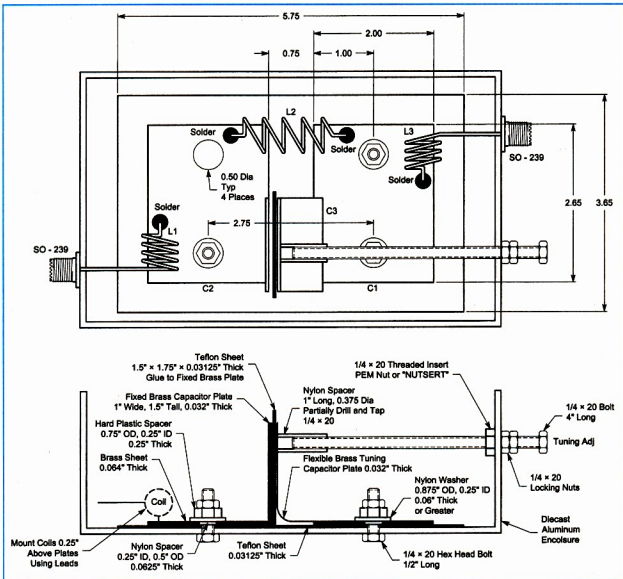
Assembly Drawing for Filter. All dimensions in inches
